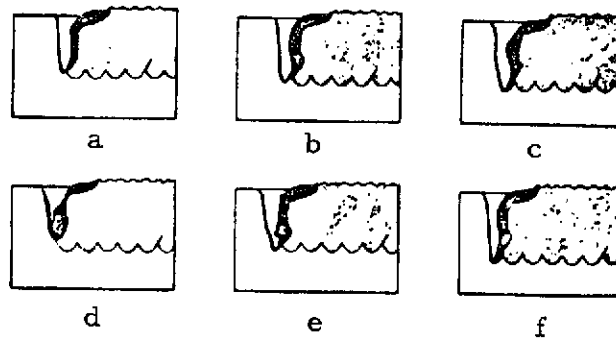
SPIKING MECHANISM IN ELECTRON BEAM WELDING
